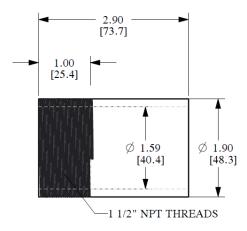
S-7. Dimensioned Drawing of the Pipe Nipple
